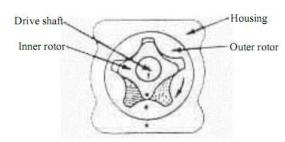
Inner and Outer Rotor Oil Pump [4]
